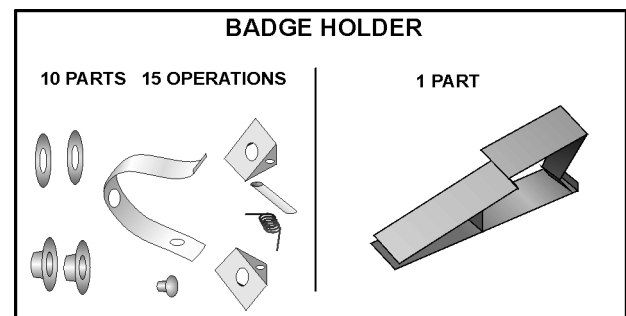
Badge Holder: Ten Part Assembly vs. Single Part
